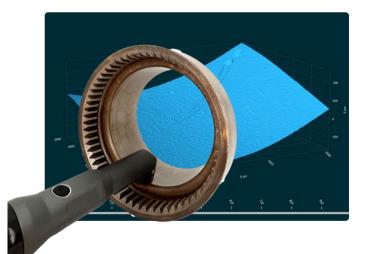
GelSight® Modulus™ 90-degree lenses inspecting the inner diameter of a jet engine component
